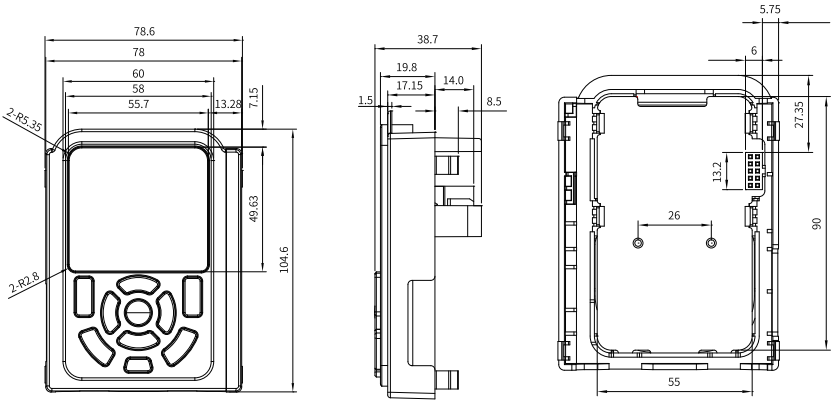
Outline and installation dimensions of LED operating panel for T1 to T4 models
